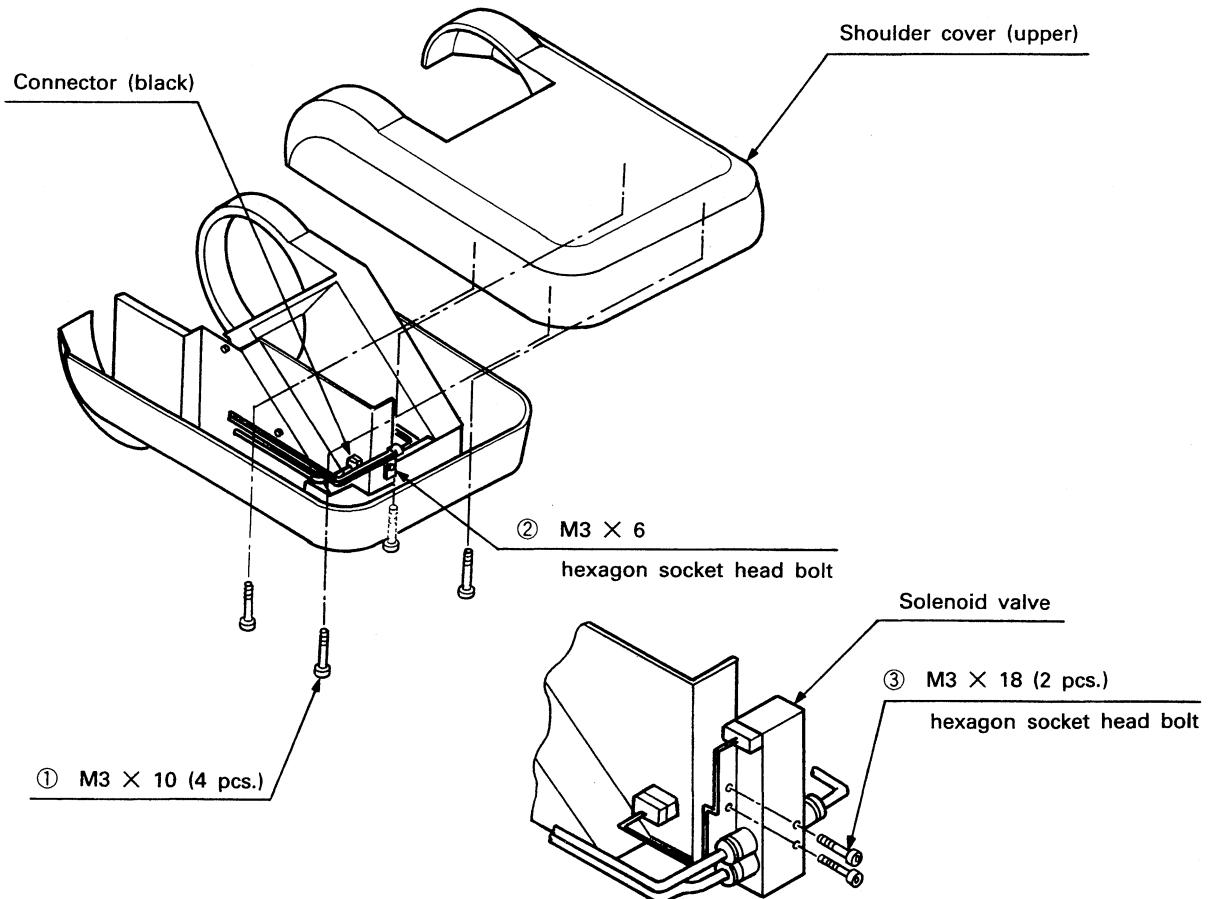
Installation of the Solenoid Valve (Option)
